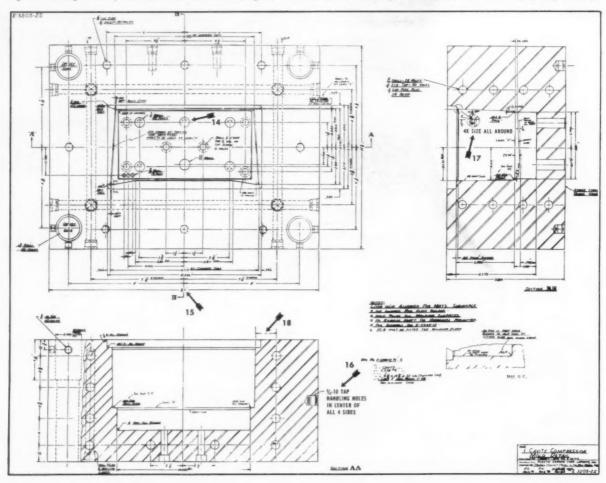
Mold designer's drawing of complete single-cavity, semi-positive compression mold for production of radio cabinet shown on p. 121
